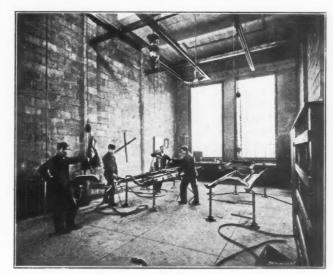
Room in which the Frames are drilled and riveted by Pneumatic Tools
